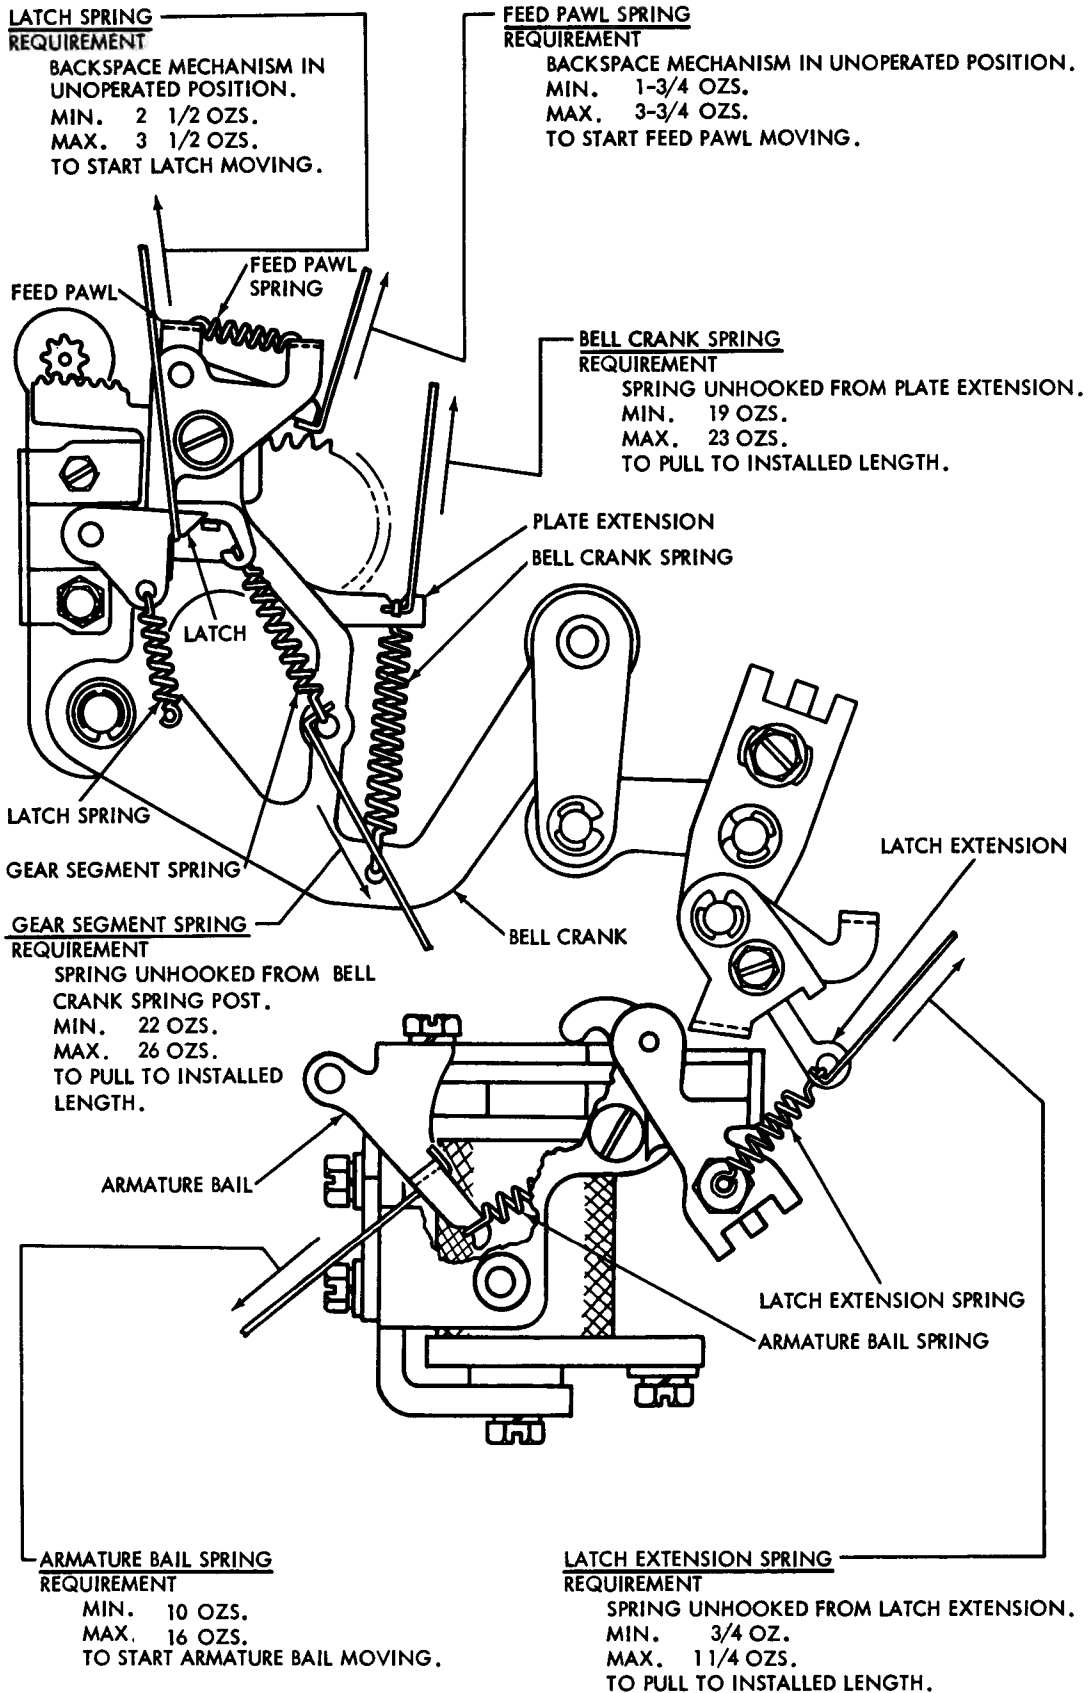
POWER DRIVE BACKSPACE MECHANISM
